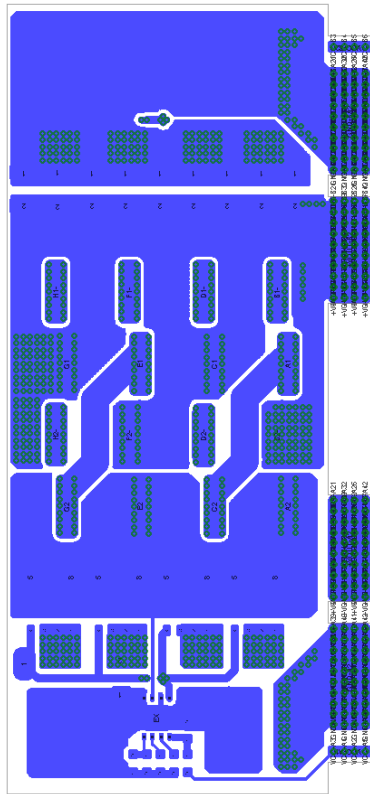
Bottom Layer PCB Layout and Assembly Plan of SR CARD
